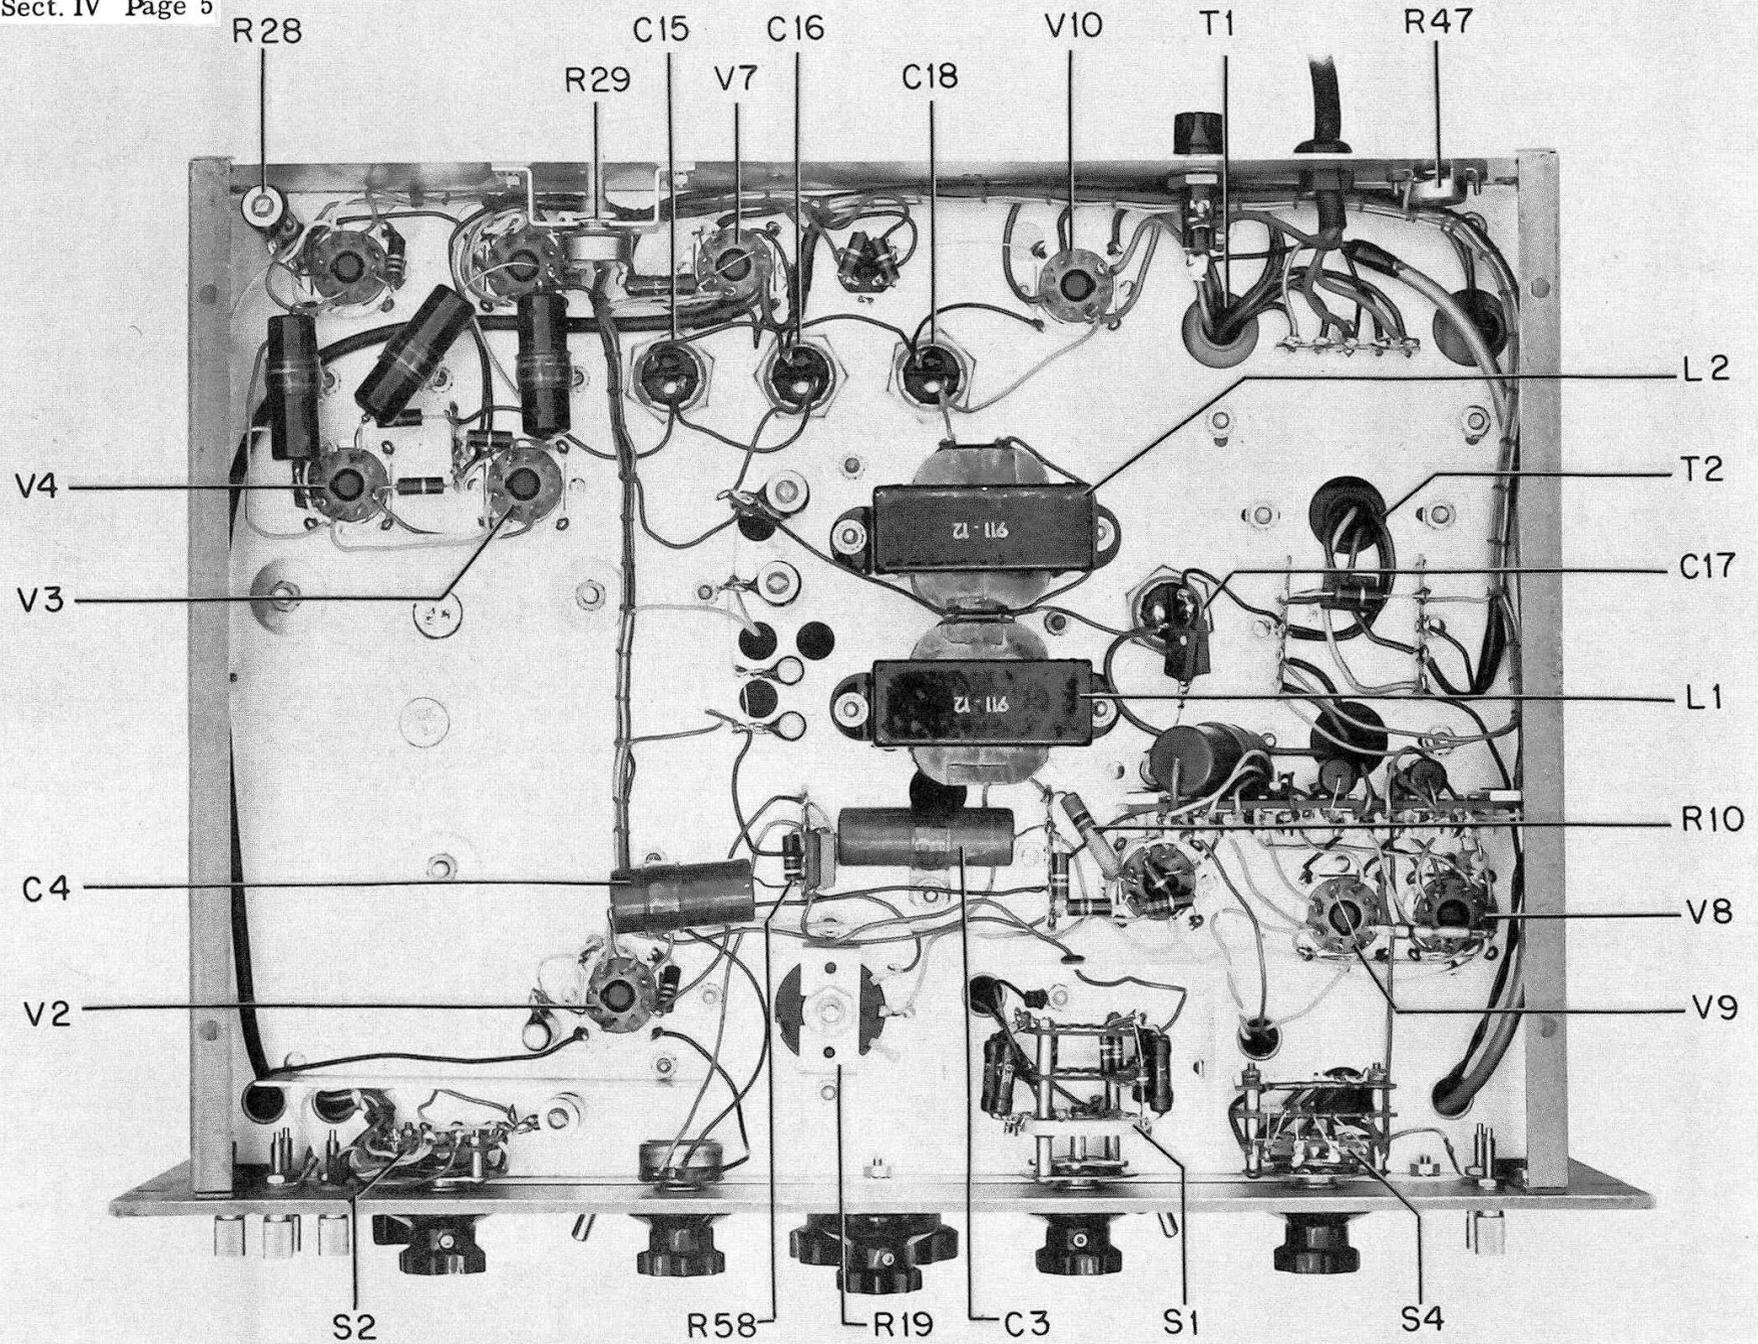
Model 205AG Bottom View Cabinet Removed
